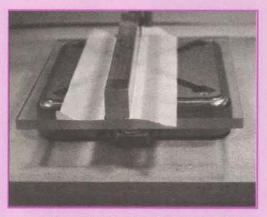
Glue the right-hand guide piece in place. Note that the lower edge is exactly parallel with the edge of the base. Check this alignment on the upper edge as well.
